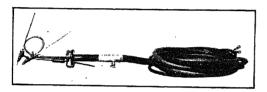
Atomic Hydrogen Welding Torch
